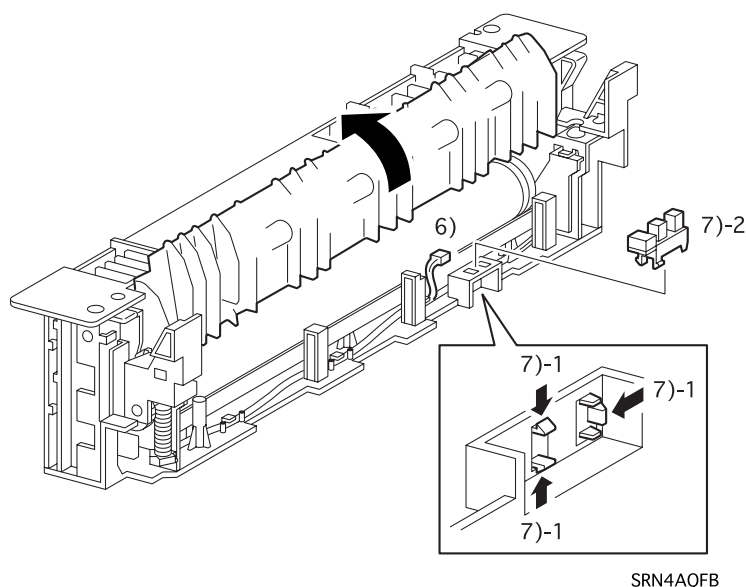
LOWER GUIDE ASSEMBLY Removal
